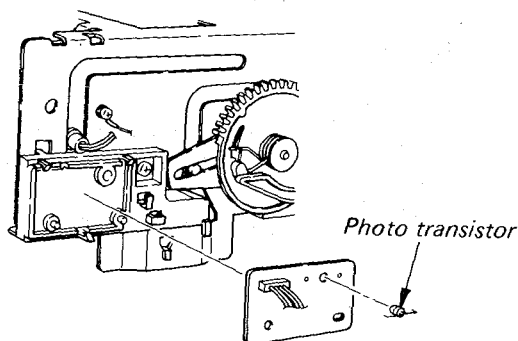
Replacement of photo transistor on FL P.C. board (L)
